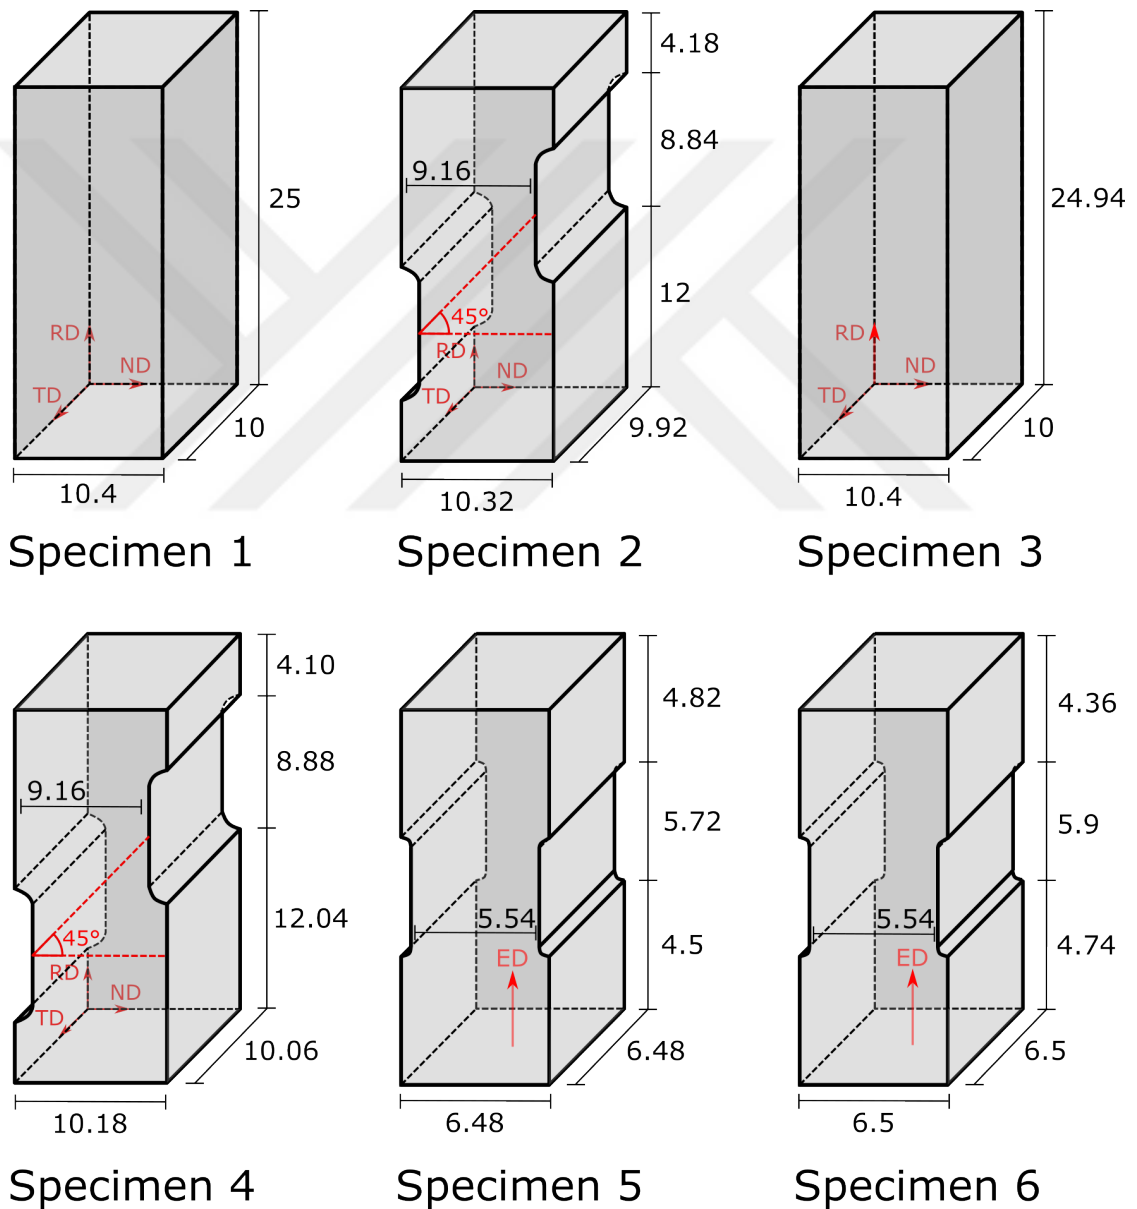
Extracted specimens and their dimensions. Specimens 1-4 are cut from the hot-rolled plate, specimens 5-6 are cut from the hot-extruded rod. All length units are millimeter.
